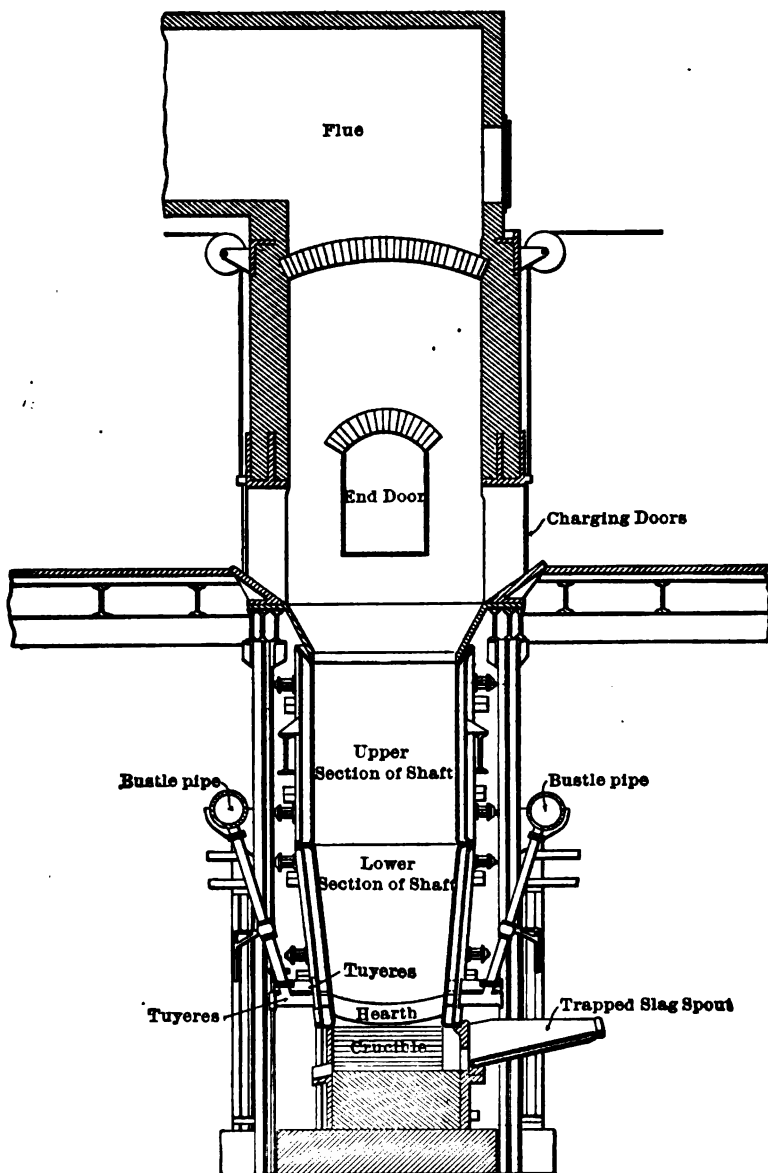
TRANSVERSE SECTIONAL ELEVATION OF 56- BY 612-IN. BLAST-FURNACE.
